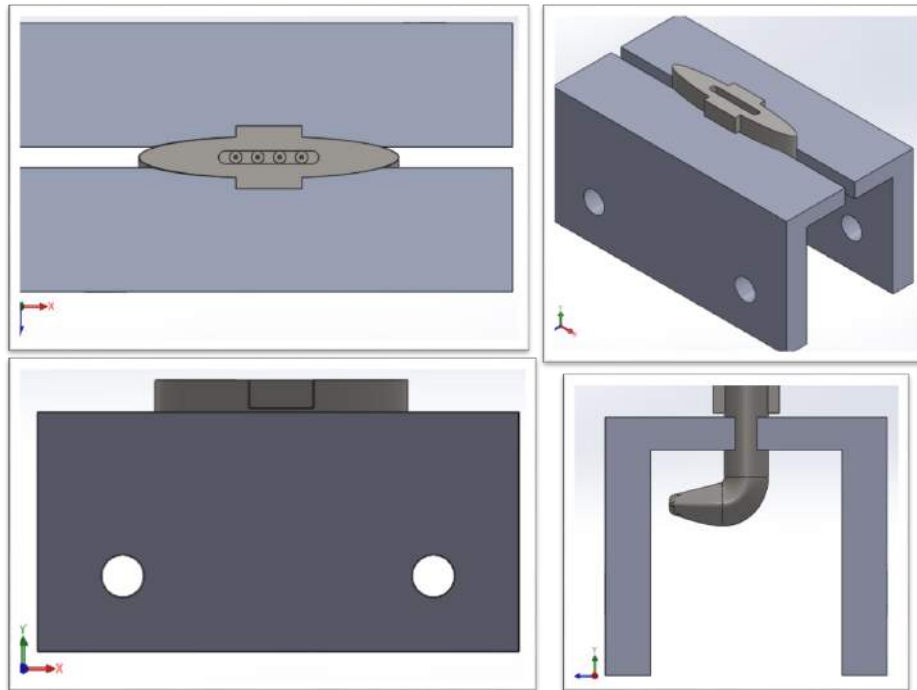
Soft Jaws. Top Left: Top View — Top Right: Isometric — Bottom Left: Front View — Bottom Right: Side View
